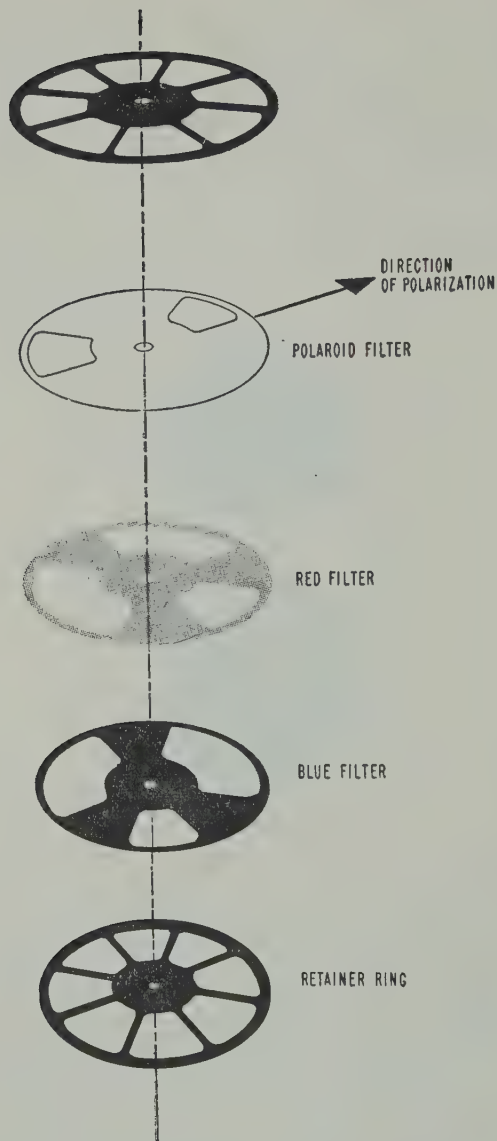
Exploded view of filter disk showing orientation and assembly of filters and Polaroid
